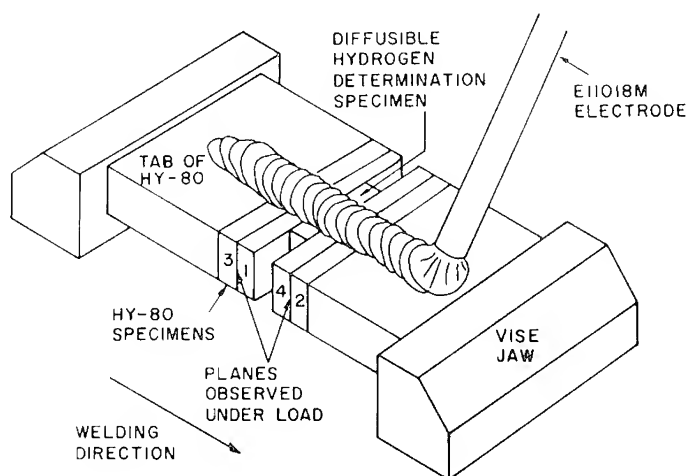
Schematic showing method of welding constant-strain cold-cracking test specimens.
